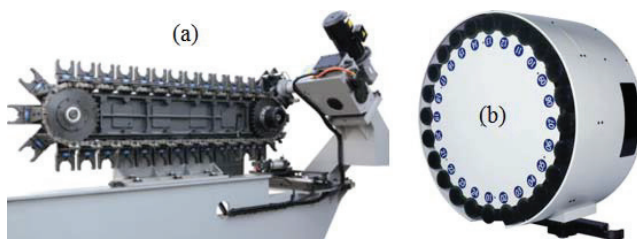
ATC tool magazine: (a) chain-type and (b) drum-type
